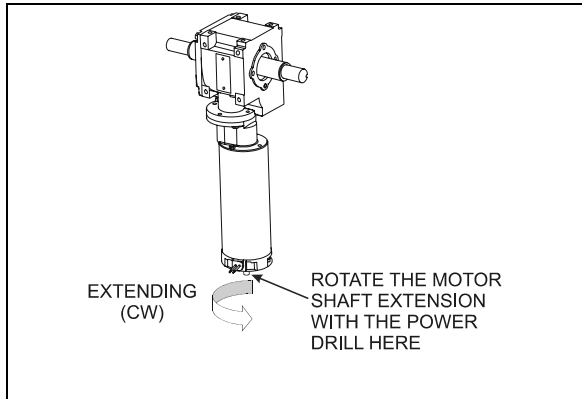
SLIDE-OUT MOTOR ROTATION
